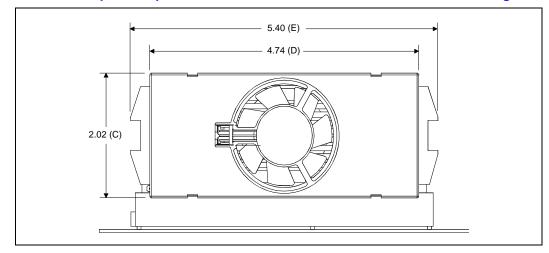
Front View Space Requirements for the Boxed Processor in the S.E.P. Package
